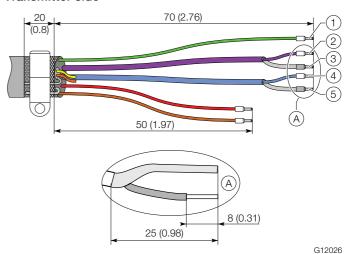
Signal Cable Part No. D173D031U01, Dimensions in mm (inch)
